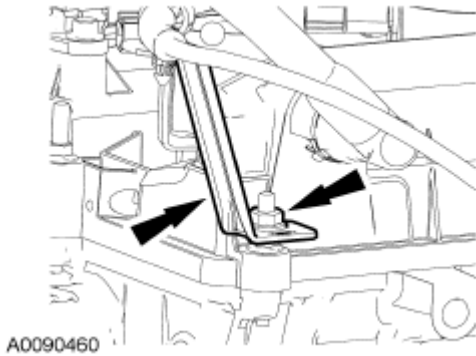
Locating Accelerator Control Cable, Bracket & Nut
